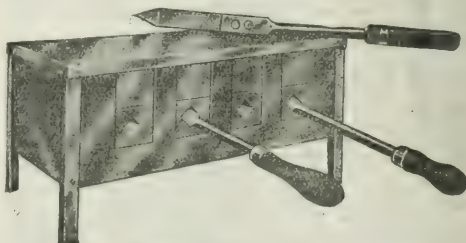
A HEATING STOVE FOR SOLDERING IRONS.
